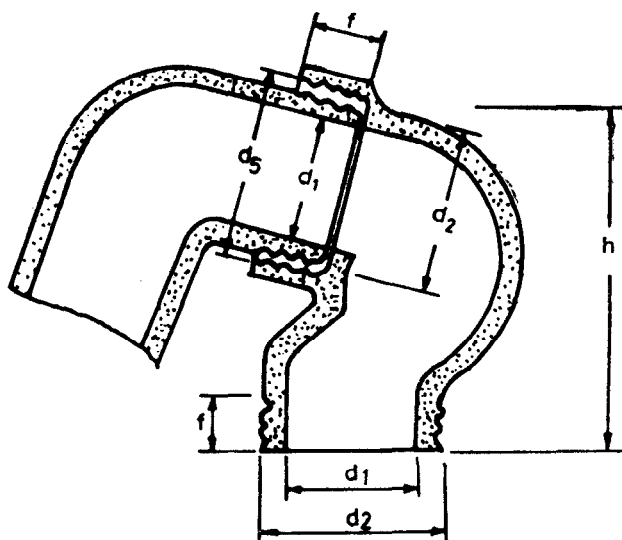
TYPICAL DETAILS OF SEPARATE OF TWO PIECES
